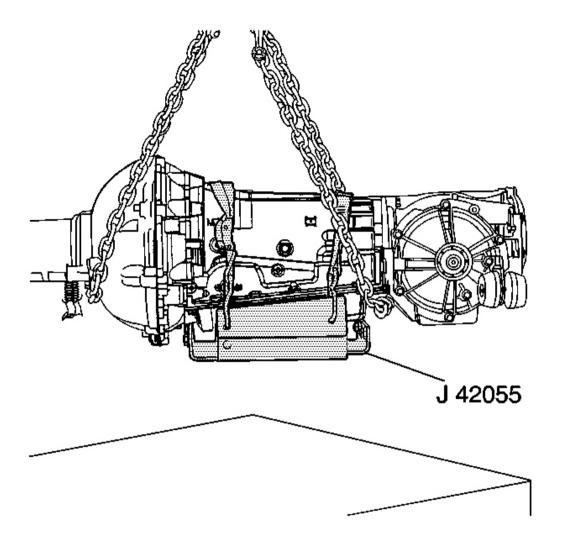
J 42055 & Transmission Jack Courtesy of GENERAL MOTORS CORP.
